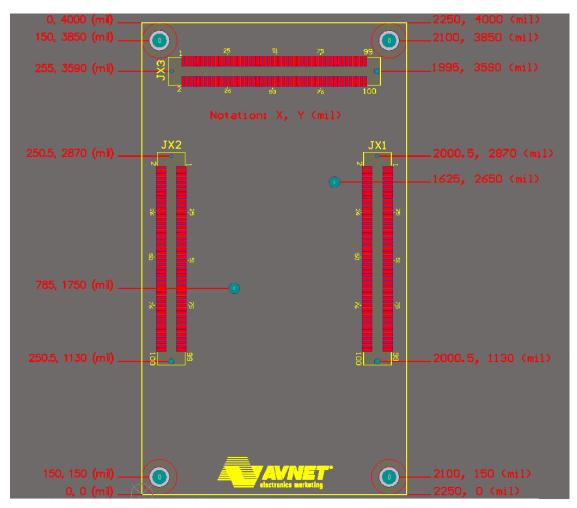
Mechanical Layout of PicoZed Carrier Card Micro Header Connectors and Mounting Holes
